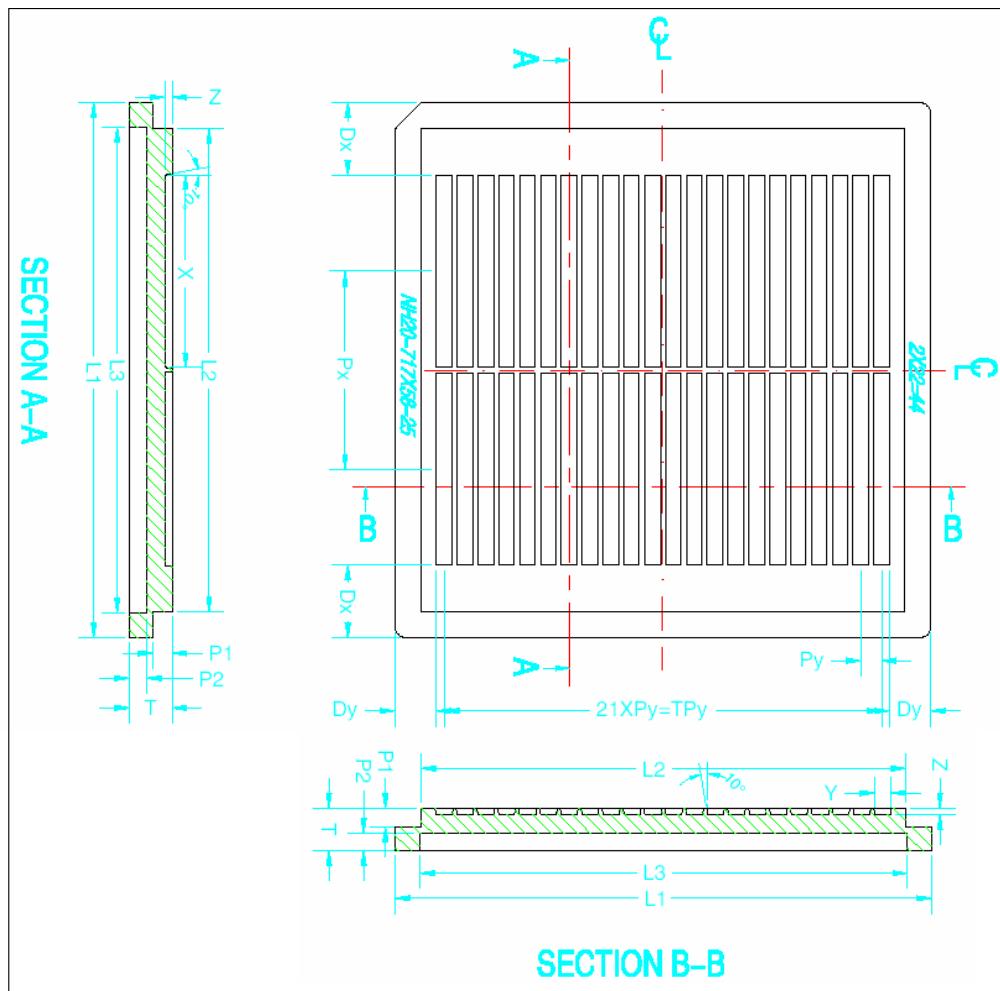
EM65570 Packing Tray Dimensional Diagram
